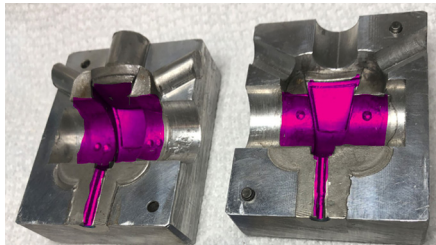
Prepared mold for pouring a hollow core with locating dimples
